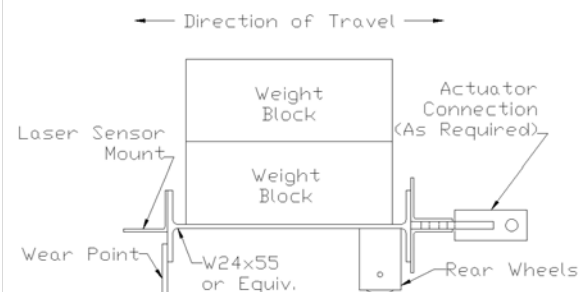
Suggested Loading Skid Assembly (Side Elevation)
